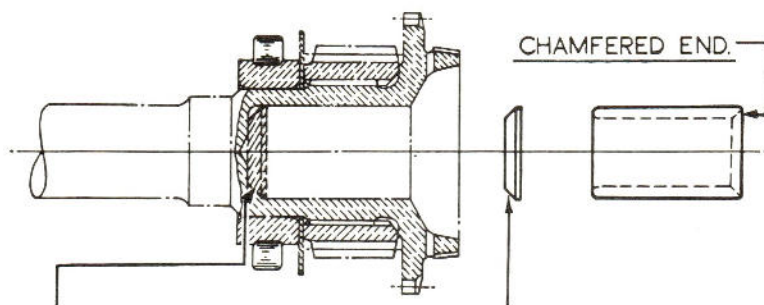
Positioning the thrust button and bush in the constant pinion shaft.
